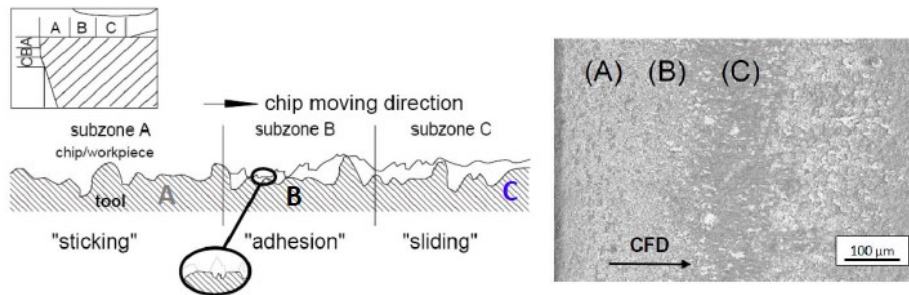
Contact area between the cutting tool and the workpiece material divided into three zones, A, B and C. [1]
